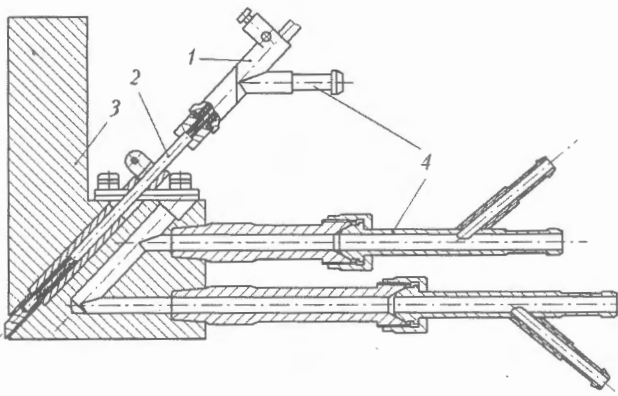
Diagram of front cover plate with edge fusion sensor: 1 – forming plate; 2 – probe; 3 – probe body; 4 – cooling system
